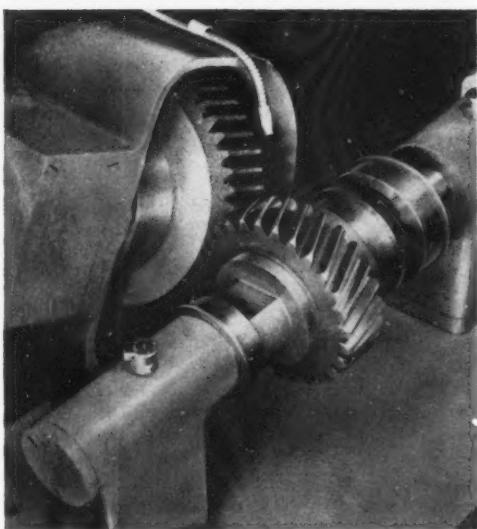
Close-up view of the abrasive wheel and a workpiece on the Michigan No. 999 abrasive finishing machine for gears
